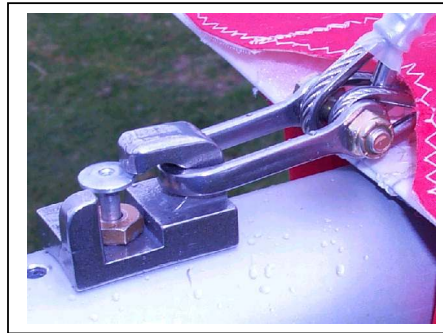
Section 4. Tensioning Cross Bar and Shackle Located in Block.
